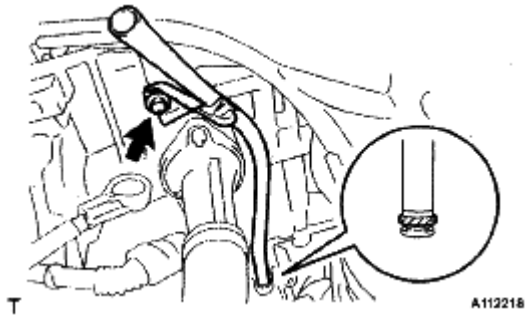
Locating Bolt And Engine Oil Level Dipstick Guide
